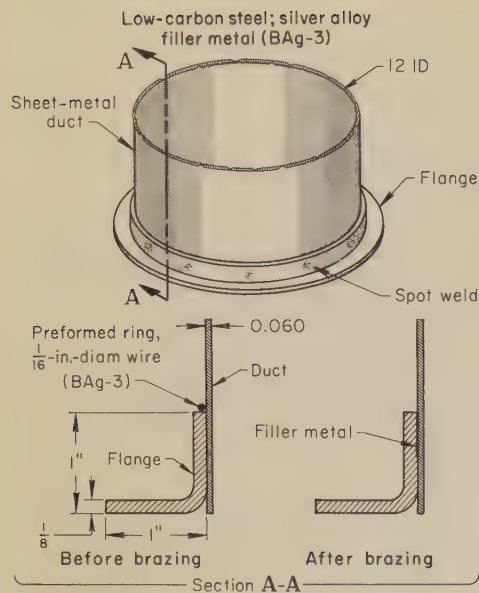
Air duct on which a flange was sealed by brazing in a turntable setup (Example 578)
